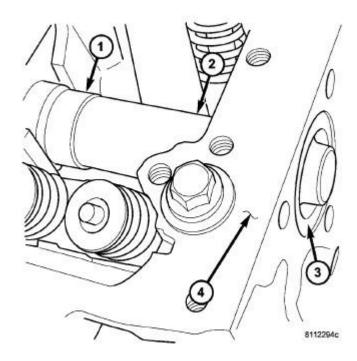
Positioning Camshaft - Left Courtesy of CHRYSLER LLC
